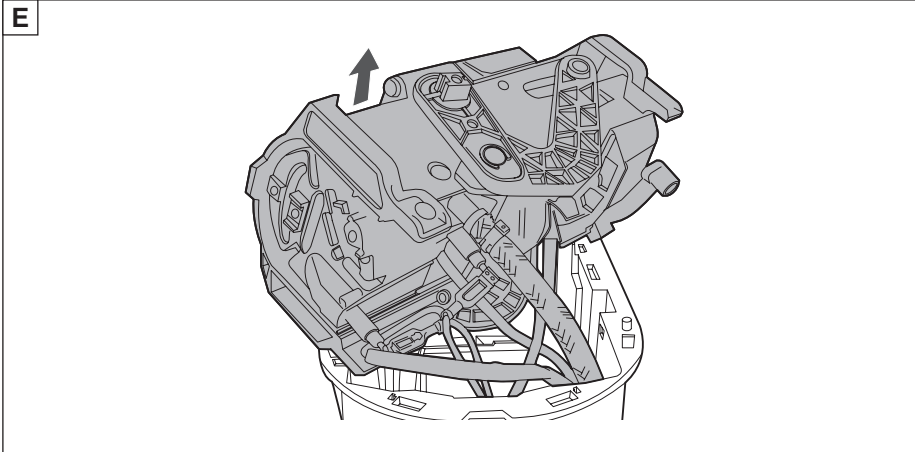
Figure E: lift the DISPENSING UNIT upwards and remove all the connected wiring. Then remove it from the machine.
